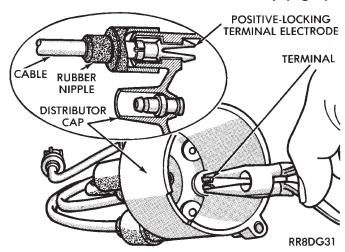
Spark Plug Cable Removal/Installation—2.5L Engines
